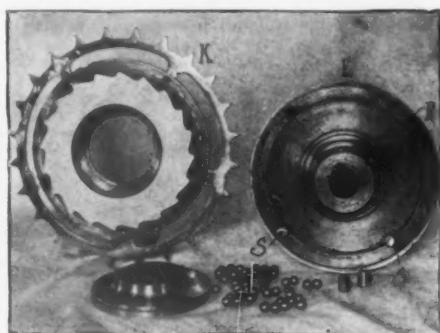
SPROCKET AND CLUTCH CONSTRUCTION
